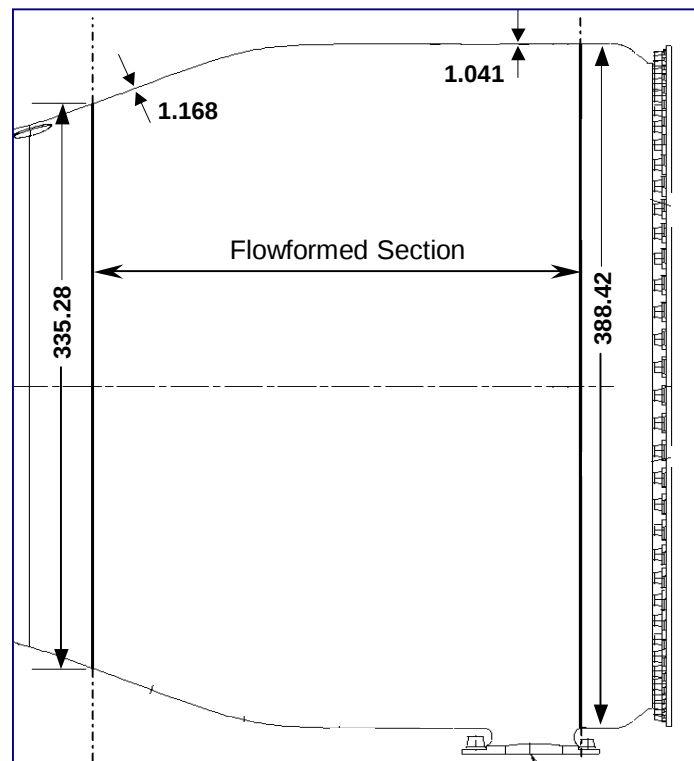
Case gas generator cross-section showing the flowformed section. The two extremities (flange and conical cylinder) are machined (due to complex internal features) and welded to the flowformed case - Dimensions in mm
